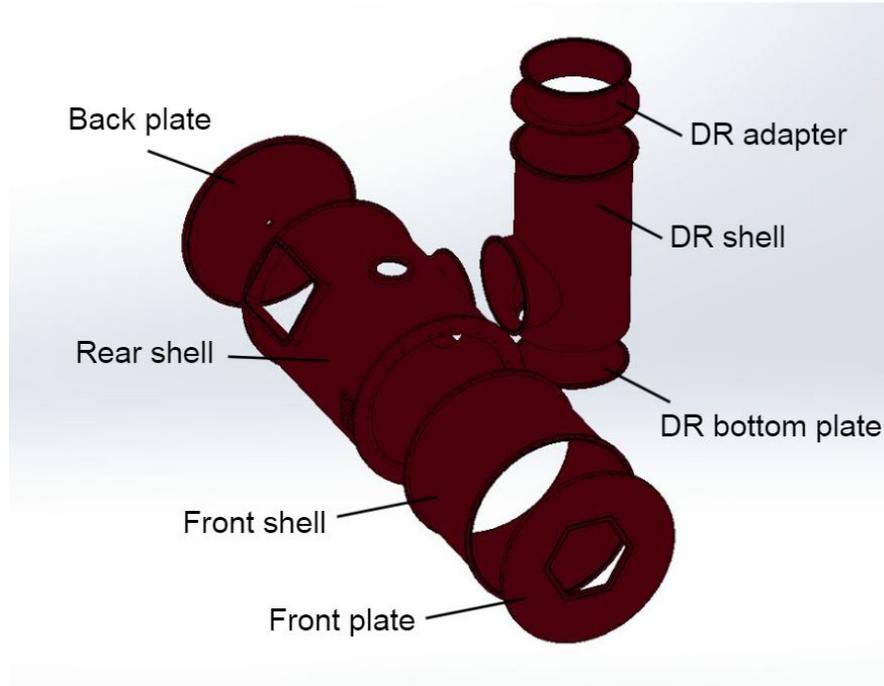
An exploded view of the 6061-T6 Al Mod-Cam vacuum shell. The main shells consist of a front and rear shell, a front plate onto which is mounted an UHMWPE window and double-sided infrared blocking filter, and a back plate which includes a vacuum flange. The rear shell includes interfaces for readout plates (rectangular cutout), a pulse tube (top cutout), and the DR shells. The DR shell consists of the main shell, a bottom plate, and an adapter to mate to the Bluefors 300 K DR plate.
